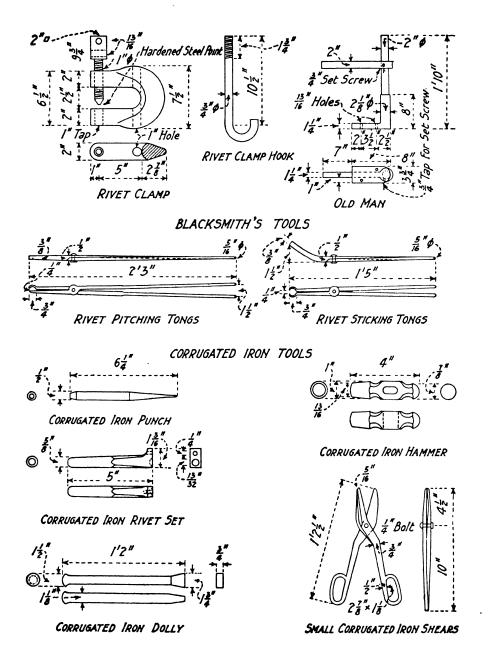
TOOLS FOR STEEL ERECTION. AMERICAN BRIDGE COMPANY.
